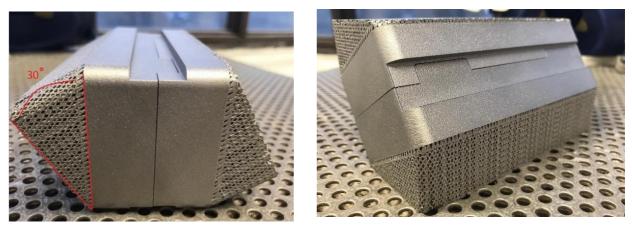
The SLM 3D printed mold inserts clamped together, before removal of support structure. The support structure is seen within the red marked 30° angle.
